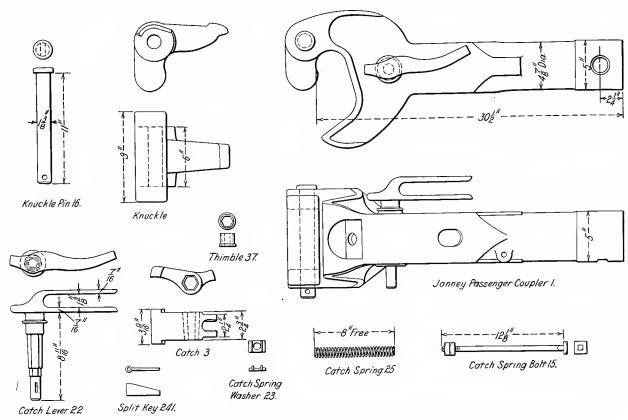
Janney Passenger Coupler No. 1 and Parts. McConway & Torley Company.
